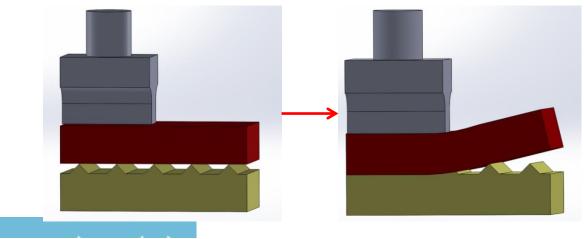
Illustration of layer warping opposite weld horn
